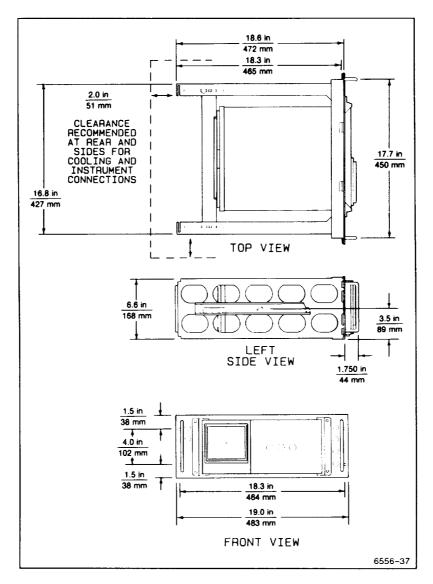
Dimensional drawing, rackmount cabinet (2240 F1R).
